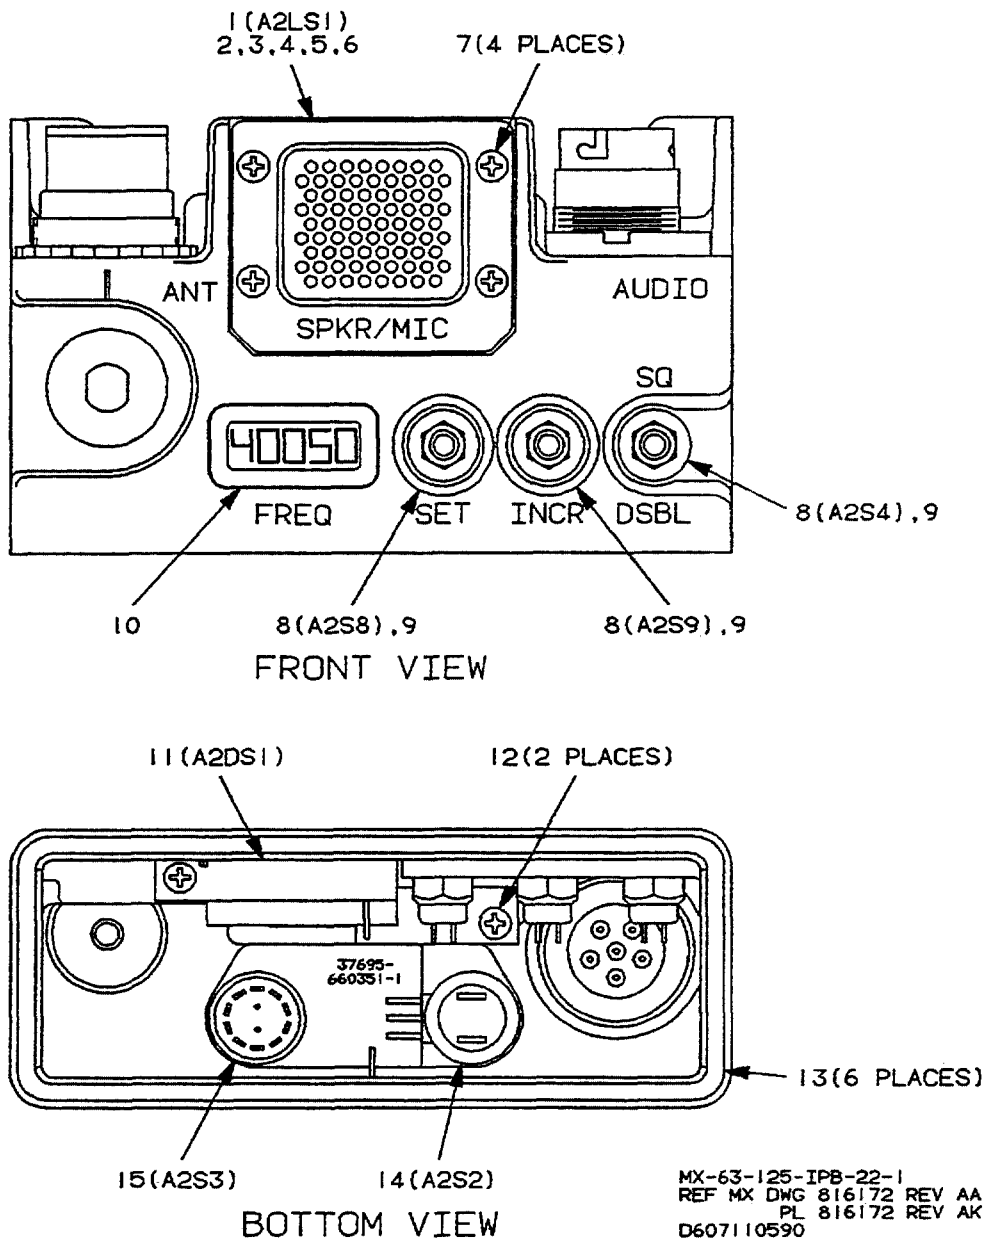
Panel Assembly (Sheet 1 of 2)
